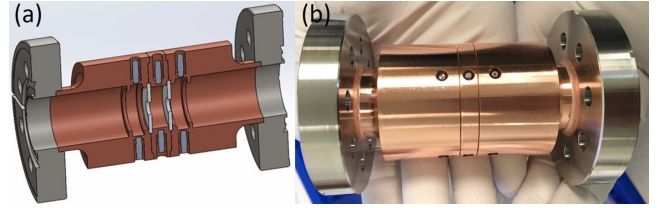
A cutaway view of the brazed DDA prototype showing the ceramics disks and tuning pins (a). The prototype after brazing (b).
